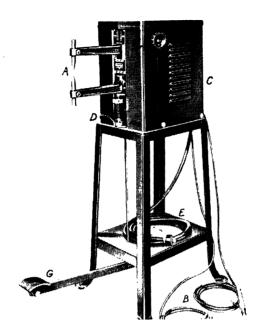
A combination spot welder and A.C. arc welder: A. Spot welder electrodes, B. Arc welding cables, C. Transformer housing, D. Change-over handle, E. Power cable, F. Current adjustment, G. Treadle (Courtesy of: Delta Manufacturing Division, Rockwell Manufacturing Company)
